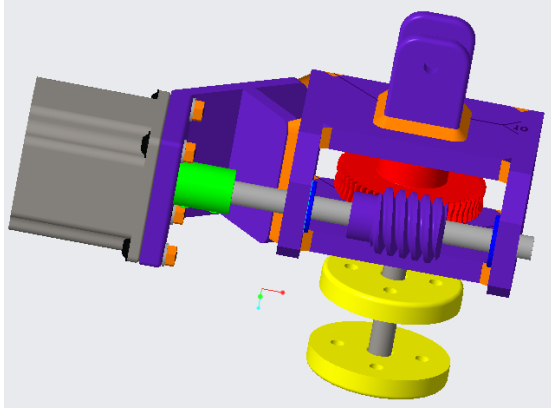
Steering Assembly Front Iso-view Figure 40: Steering Assembly Rear Iso-view
